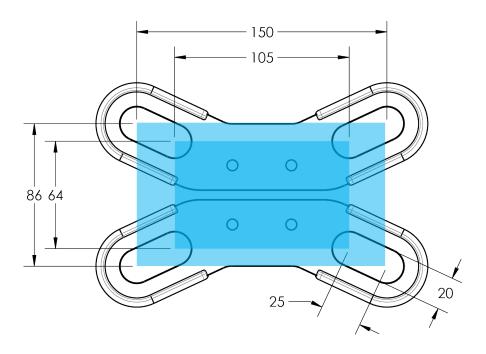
Technical dimensions of the Small Suction Cup Brackets
